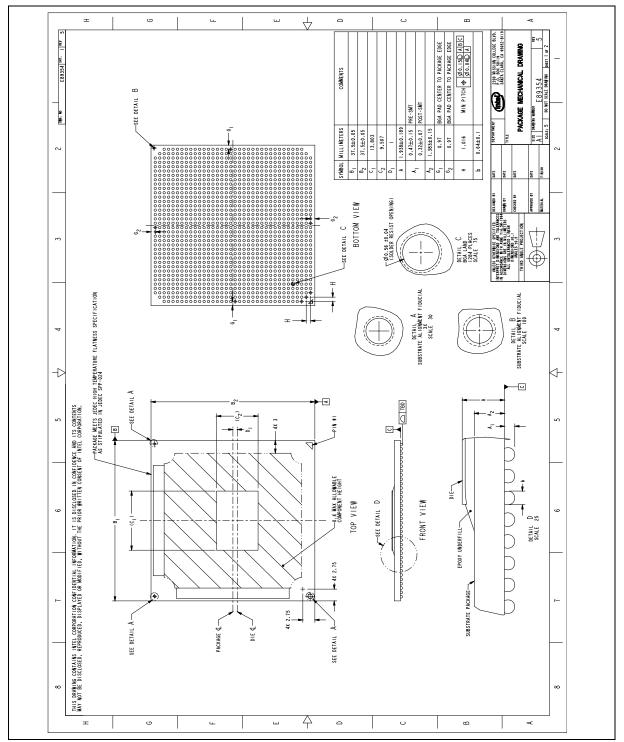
Processor 2-Core Die / 1-Core Die Mechanical Package
